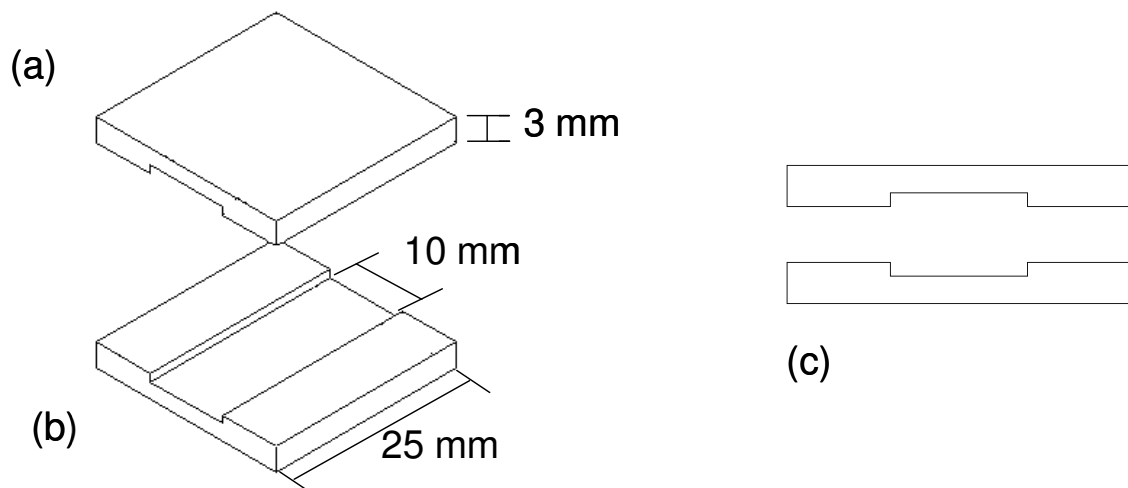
A schematic illustration of the end-tab assembly: (a) Top end-tab; (b) Bottom end-tabs; and (c) Side-view.
